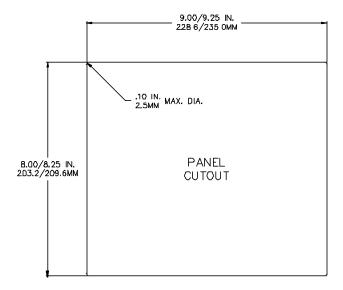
660, 661 and 662 Panel Mount Cut-Out
